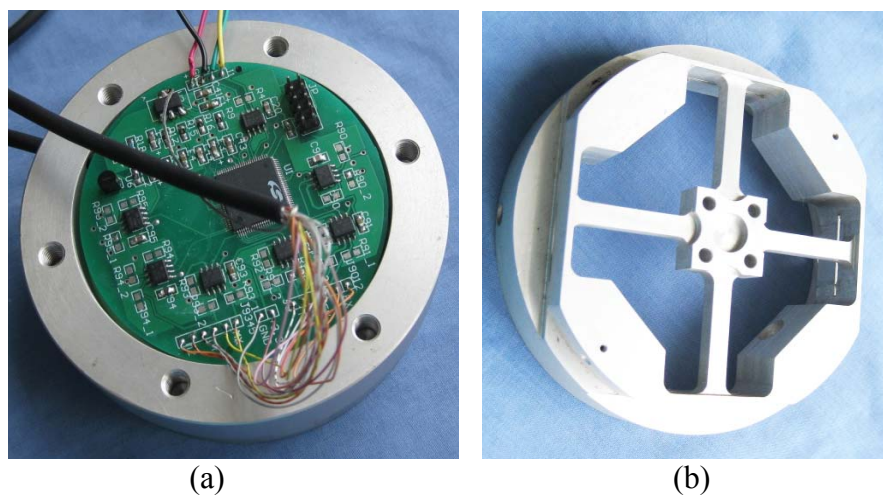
The fabricated six-dimensional force/torque sensor: (a) the integrated printed circuit board; (b) the elastic element.
